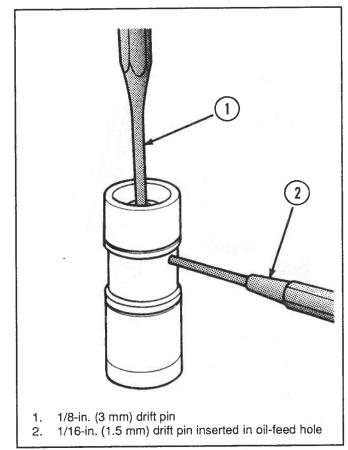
Oil-Feed Holes Aligned and Drift Pin Installed
